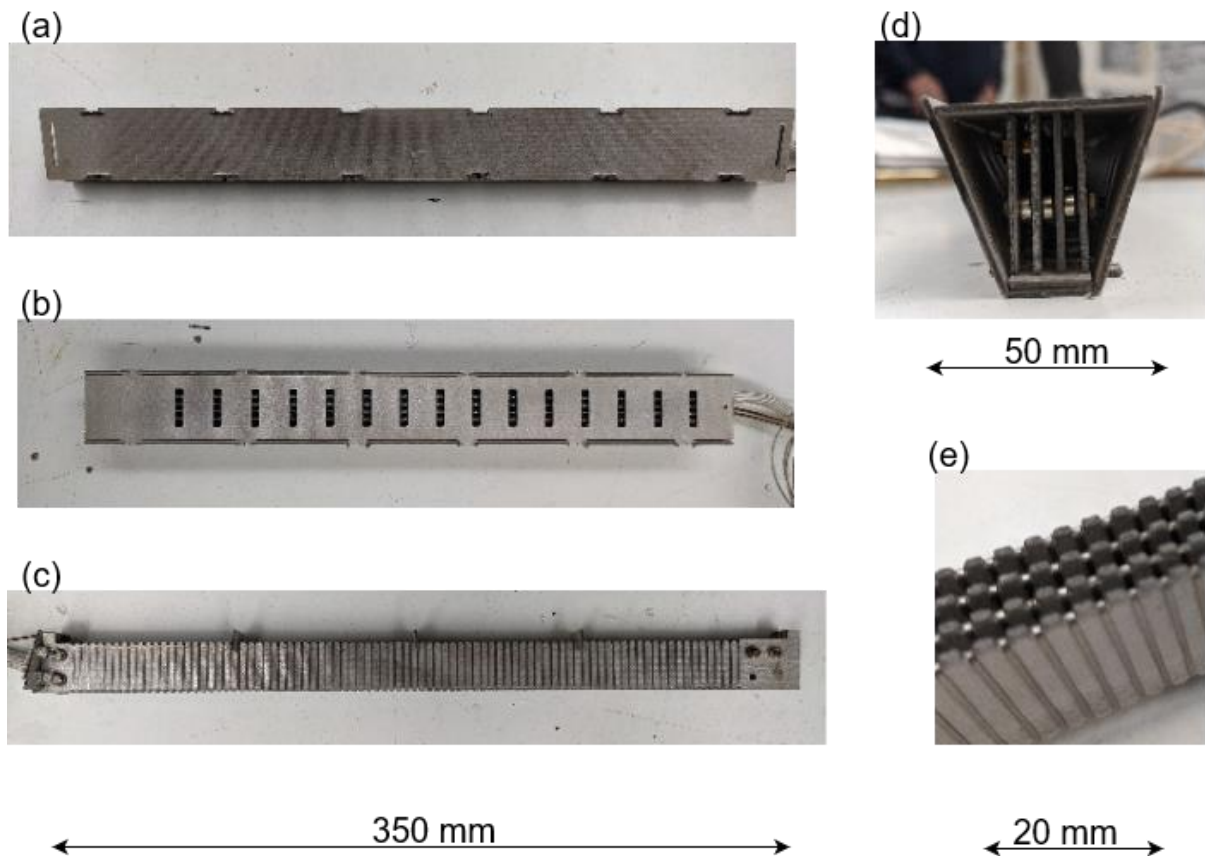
Replacement air heaters used in prototypes IB and II. (a) Completed assembly, side view. (b) Completed assembly, top view. (c) Heating elements side view. (d) End view of completed assembly with end piece removed, showing heating elements within. (e) Detail of heating element, showing resistive wire on mica support.
